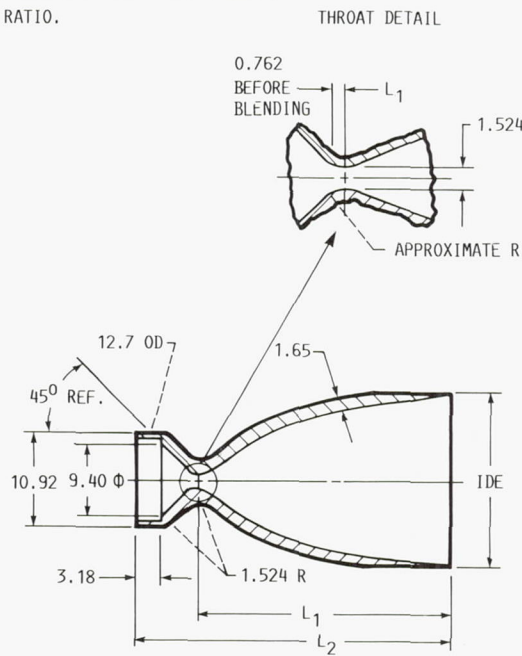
BELL NOZZLE DESIGN. (ALL DIMENSIONS ARE IN MILLIMETERS.)
